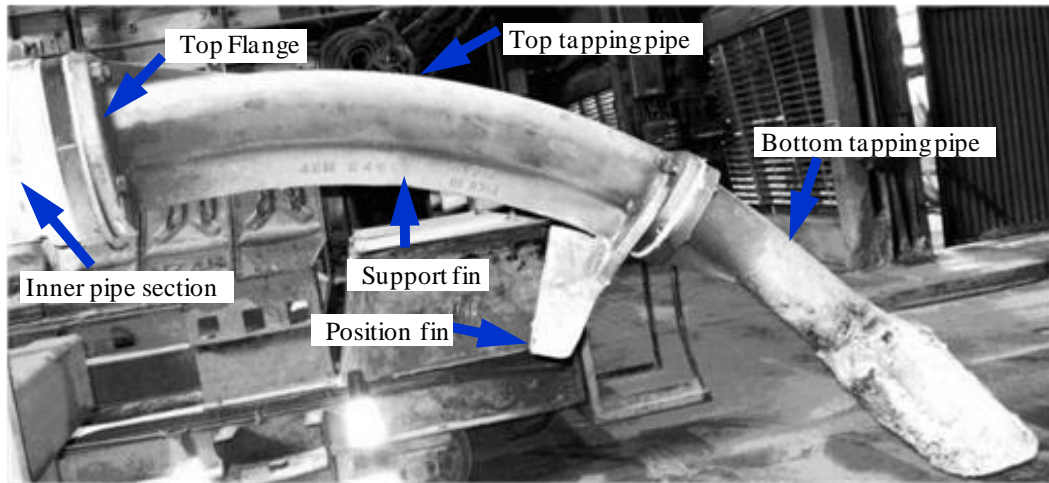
The tapping pipe assembly (Lines 1-3).
